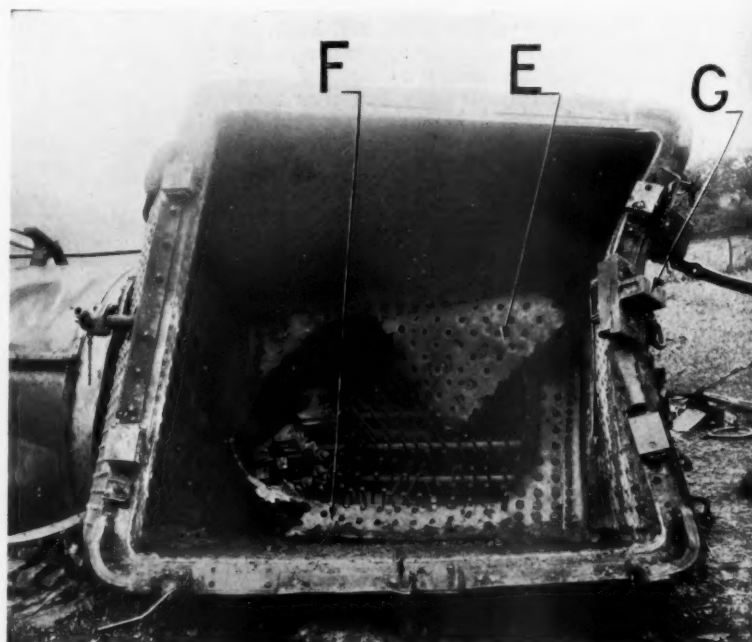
Inside firebox showing burst crown plate and distortion of rear-end attachments
